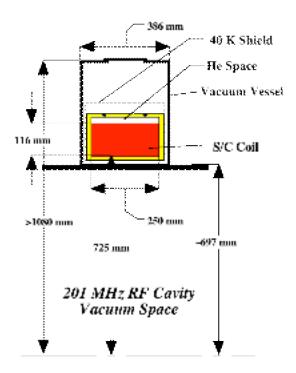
A Cross-section View of Half of the Coupling Magnet Showing the Basic Magnet Dimensions
